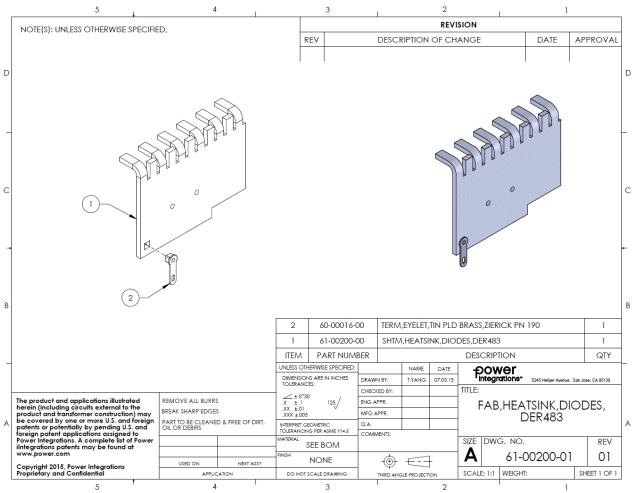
Secondary Heat Sink Sheet Metal Drawing.
